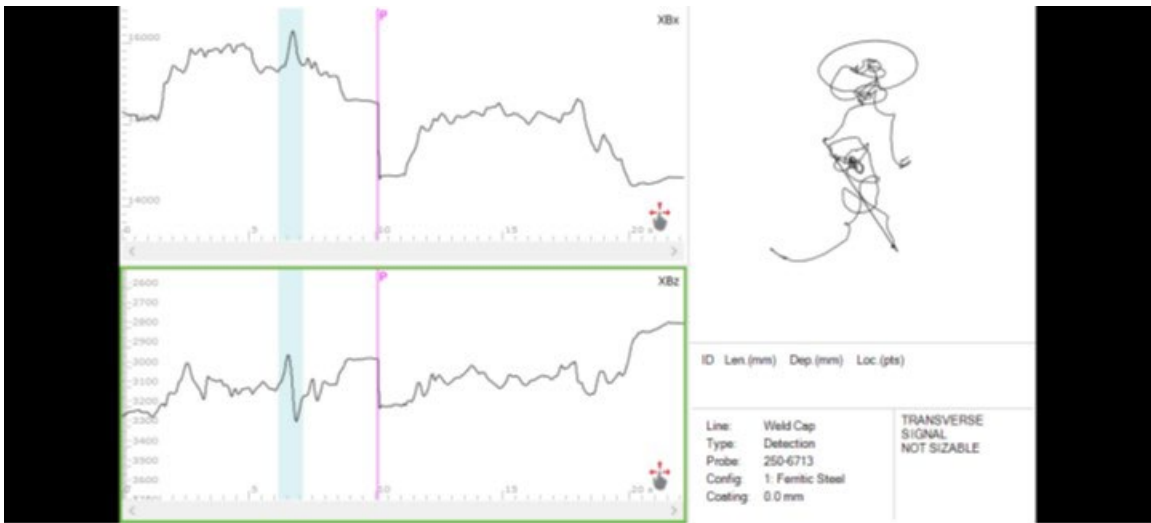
ACFM scan data of Flaw 1 for fillet weld MGL-9 panel
